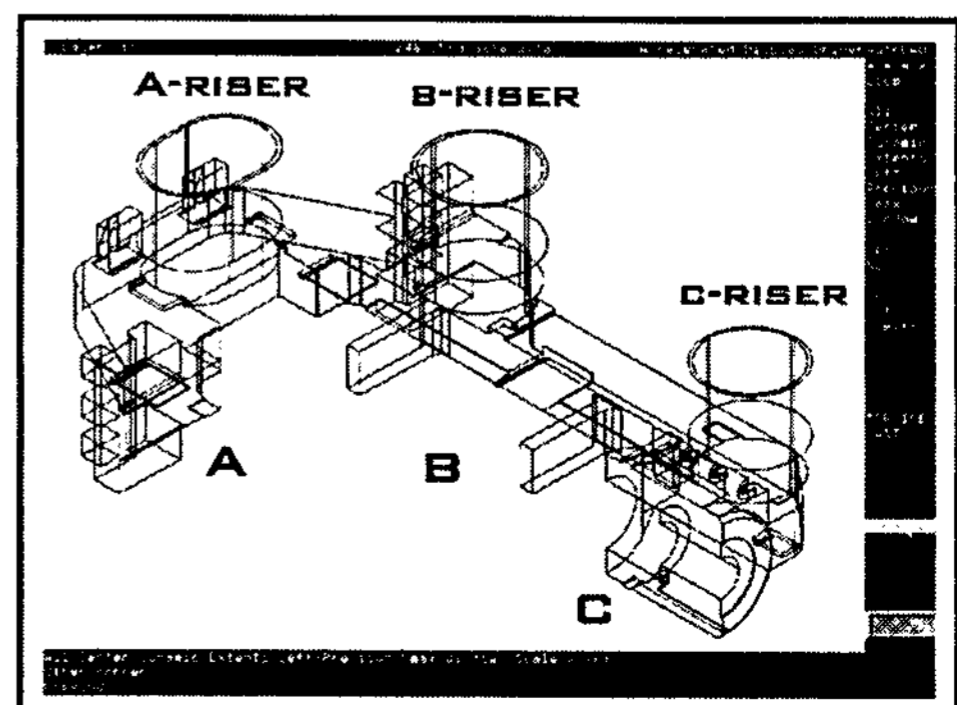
A schematic drawing of a mill housing for evaluating modulus.
